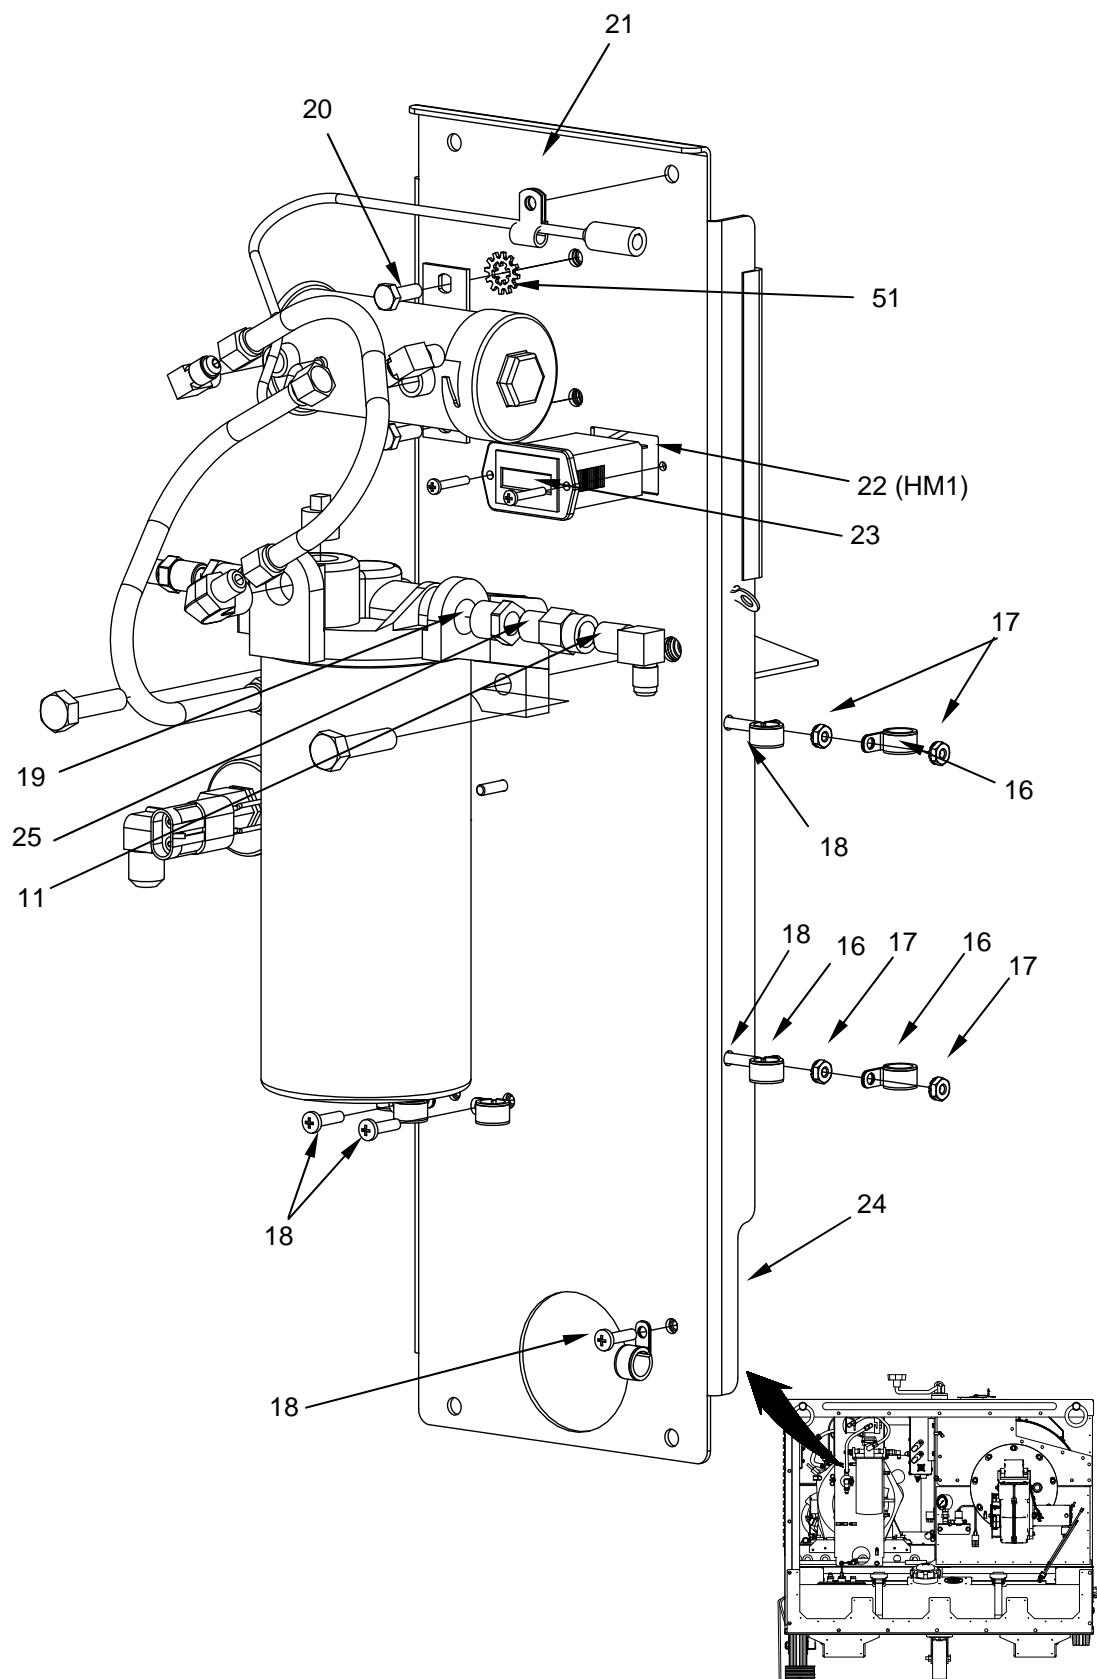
Fuel System Assembly (Sheet 2 of 4).
